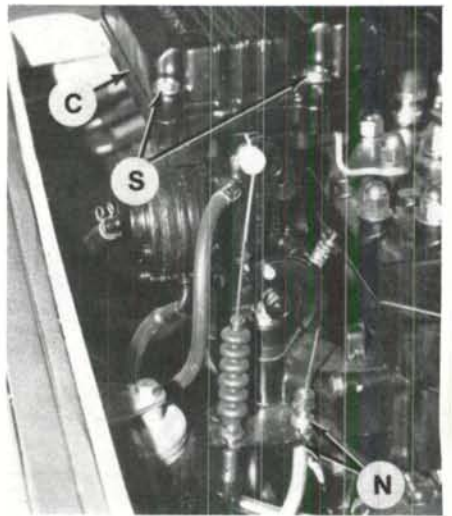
Rotate locknuts (N) up or down cable housing end as needed to adjust throttle lever free play. On all JS440 models and JS550 models after 1985, remove two cap screws (S) on each side of cover (C) to withdraw cover (C) and flame arrestor.
